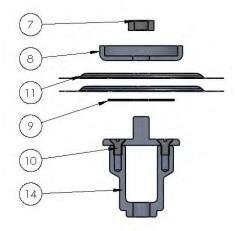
Exploded View of Diaphragm Head Assembly and Yoke
